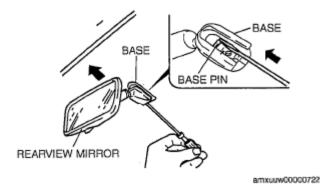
Removing/Installing Rearview Mirror Courtesy of MAZDA MOTORS CORP.
